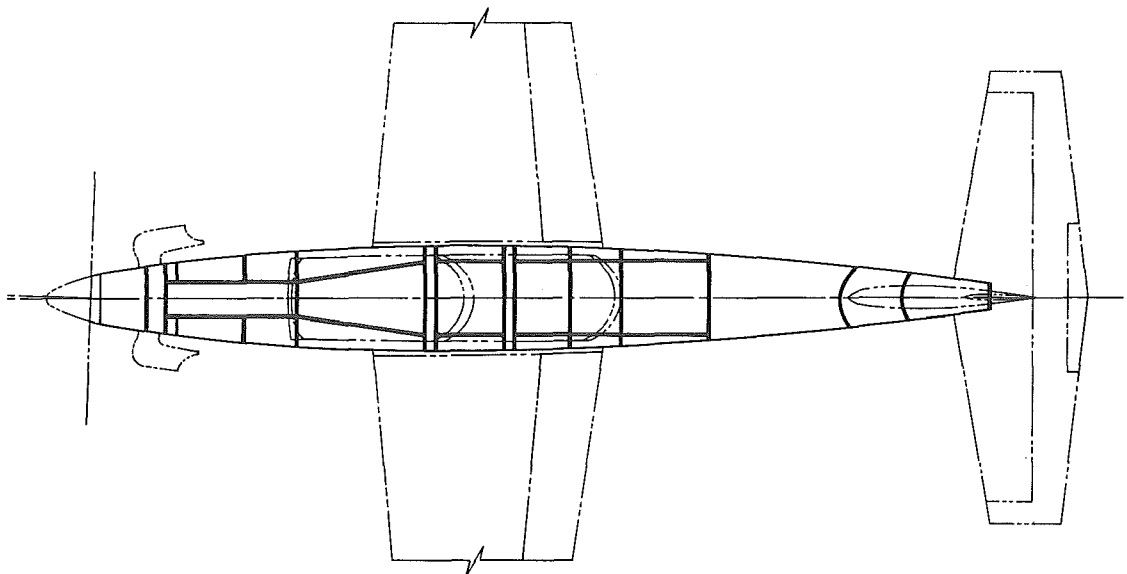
PLAN VIEW OF FUSELAGE STRUCTURE
